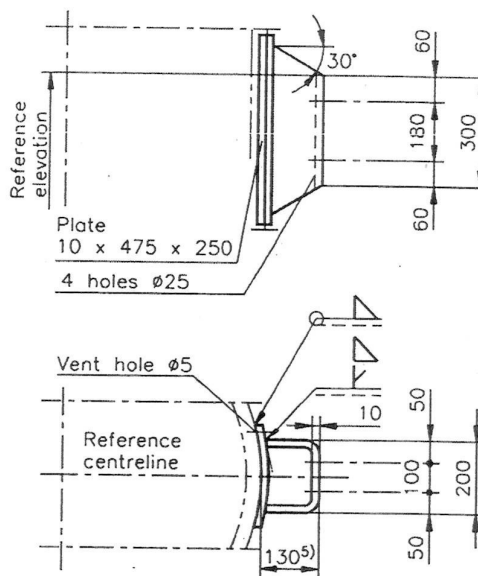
Clip, type 3E, welded to vessels with cold insulation
